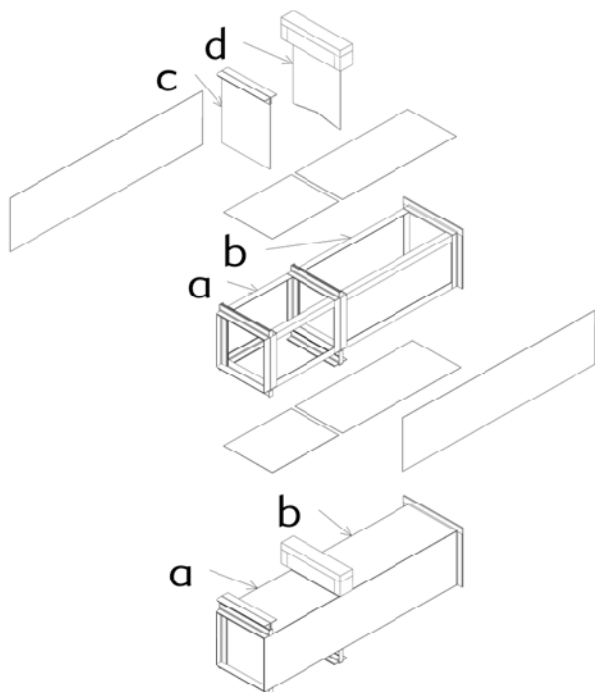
The drawing device and its components: a) drawing chamber b) extension outside of the wall to allow the actuation of the device d; c) outside guillotine for grains drawing; d) inside guillotine (valve) for closure during the drawing.
